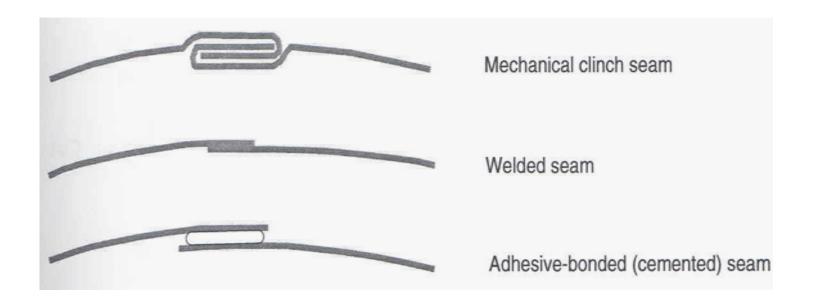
Mechanical, welded, and adhesive-bonded side seams for three-piece cans
